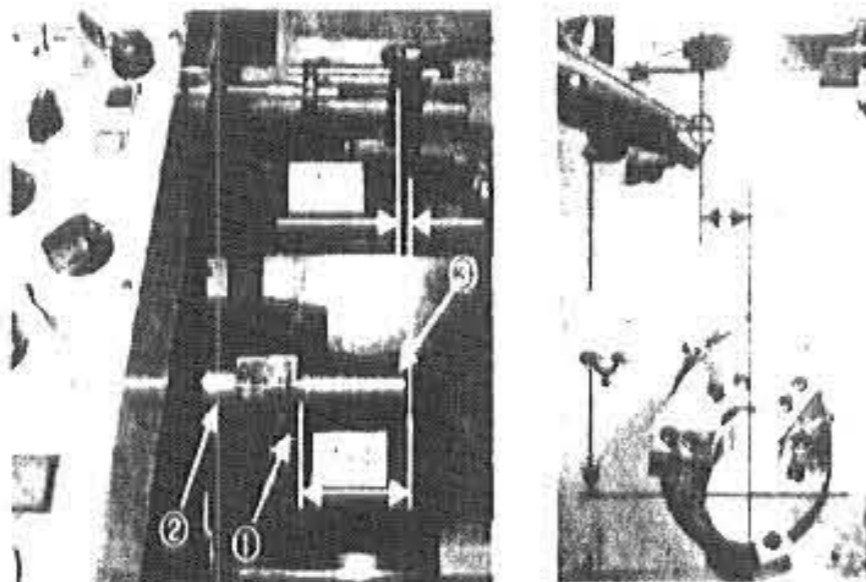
Setting condition of mist collecting tube. (①: soft jaw, ②: chuck(6 inch), ③: workpiece)
